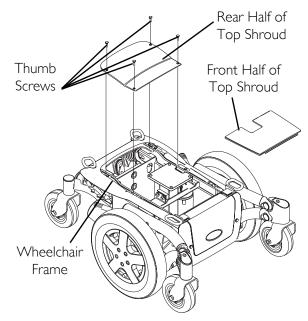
Removing/Installing the Top Shroud - Wheelchairs with Elevating Seat
